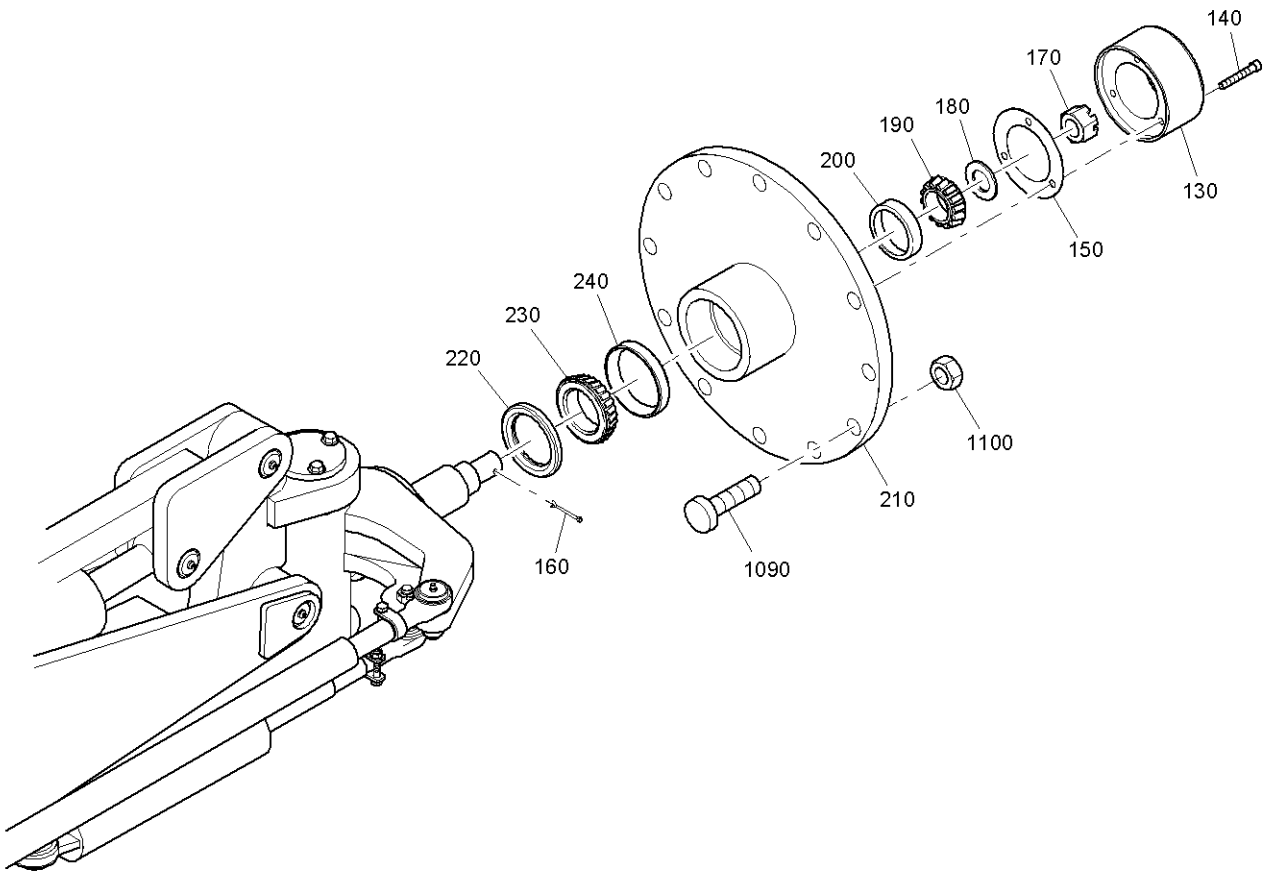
FRONT AXLE ASSEMBLY (SHEET 2 OF 6)
